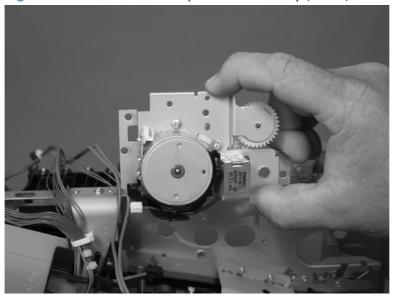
Remove the duplex drive assembly (1 of 2)
